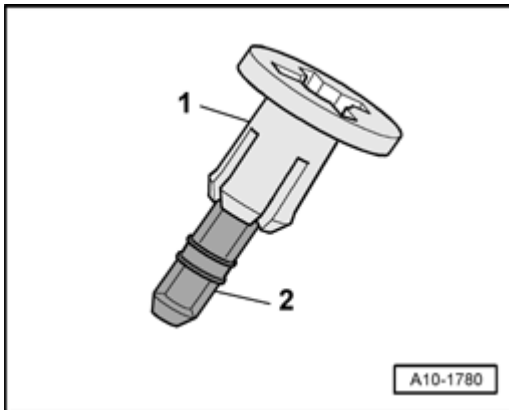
Identifying Fasteners At Lock Carrier & Pin
